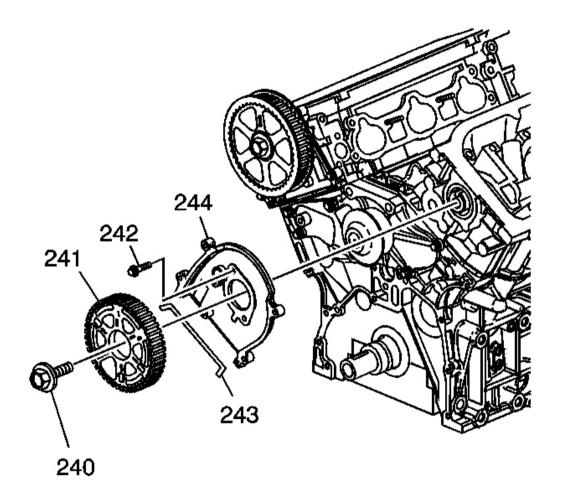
View Of Camshaft (CMP) Sensor Courtesy of GENERAL MOTORS CORP.
